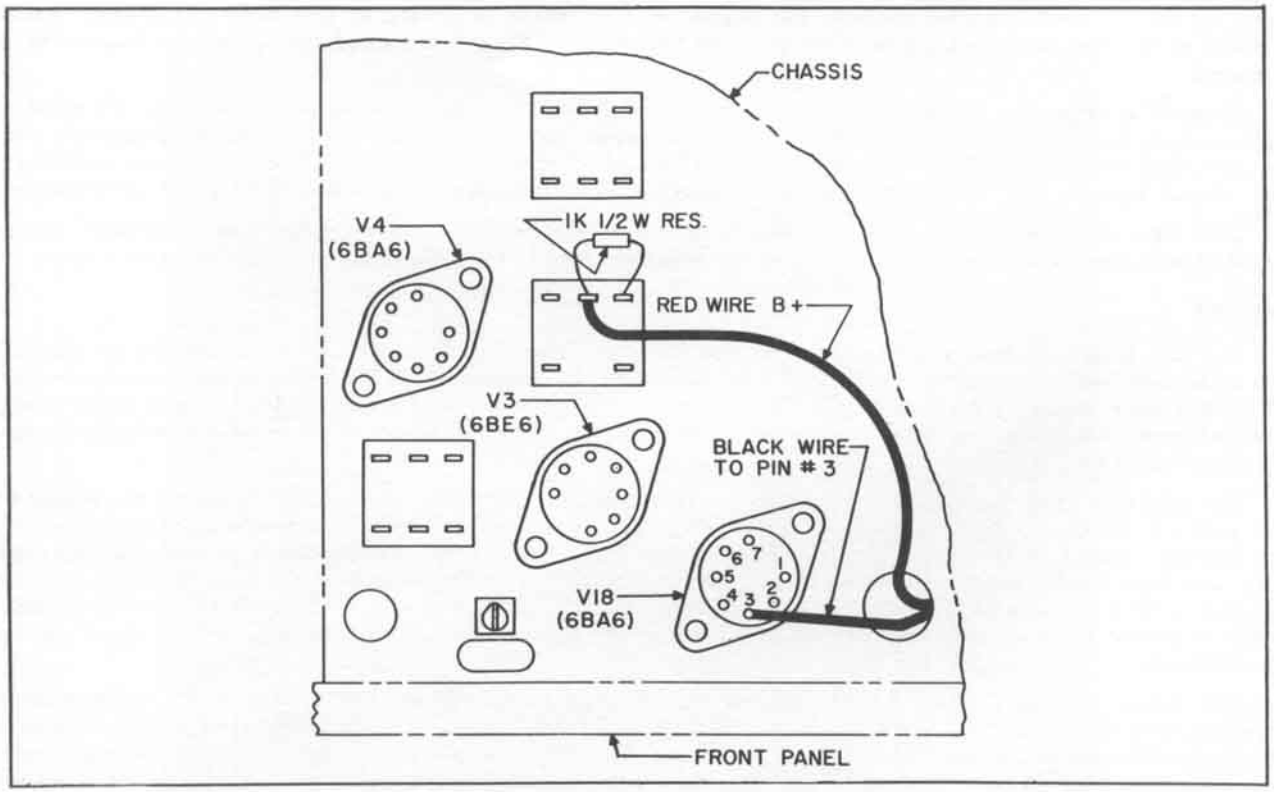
HQ-180 Bottom View of Chassis Showing New Connections from I.F. Noise Silencer.
